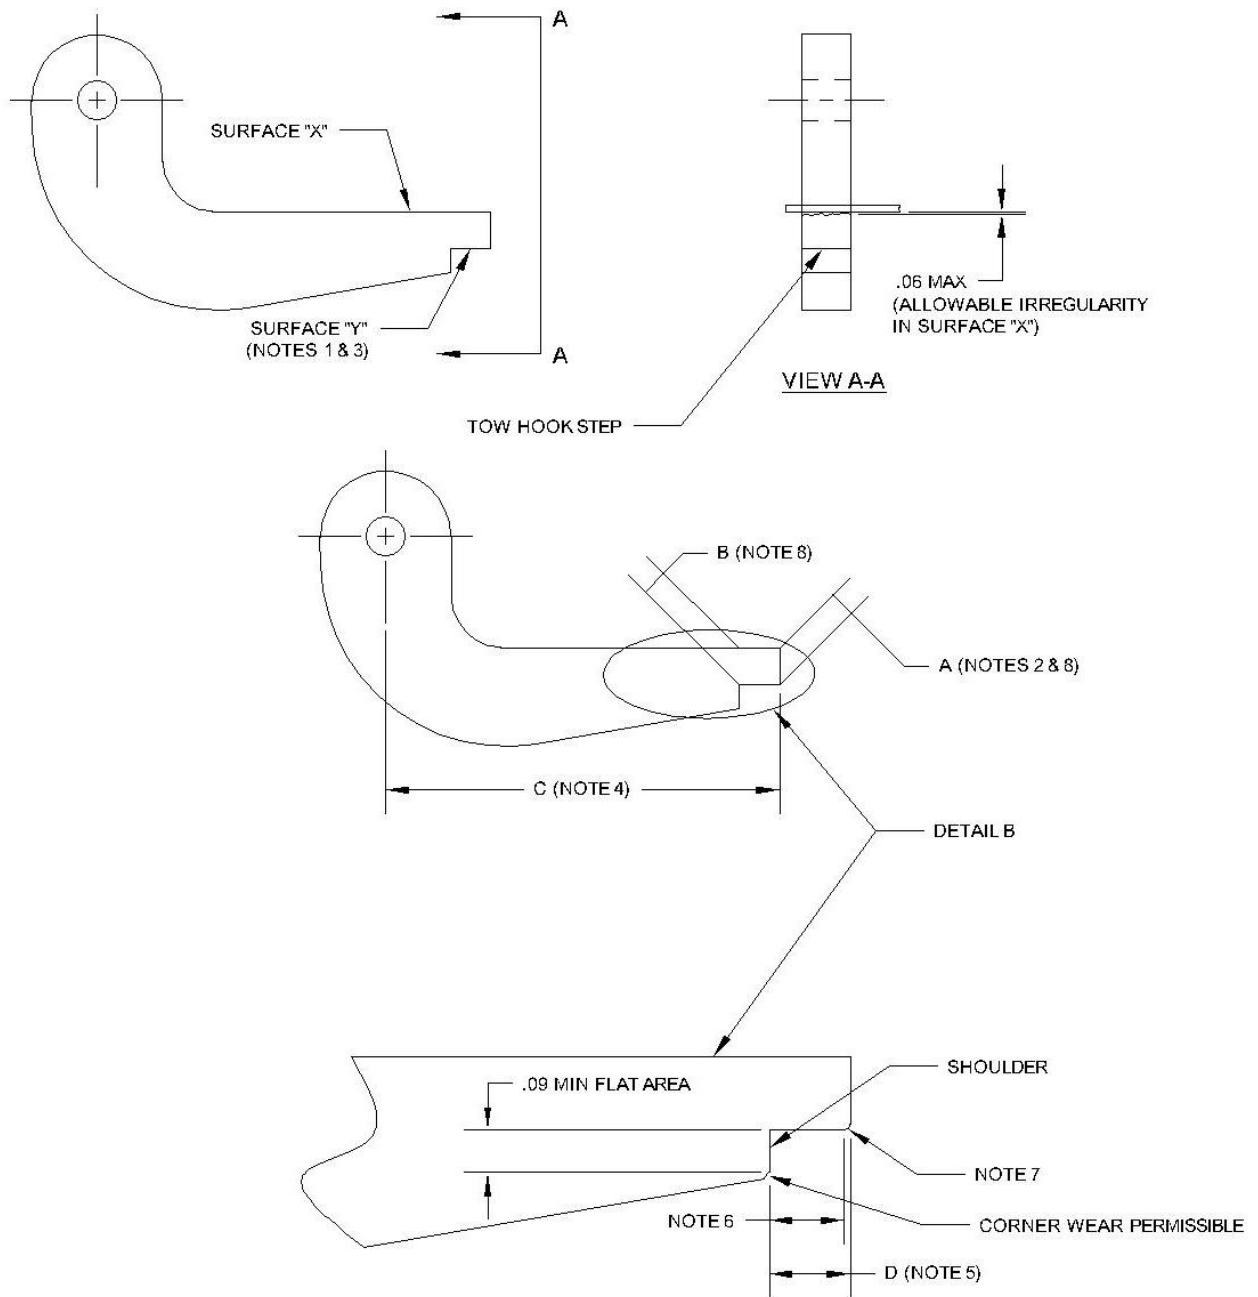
TOW HOOK INSPECTION AND REWORK (SHEET 1 OF 2)
